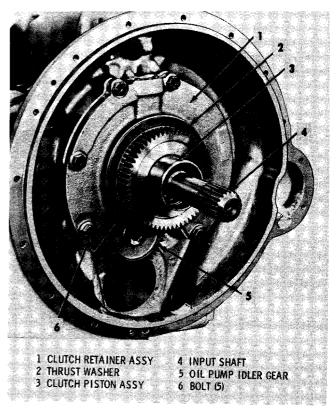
Clutch retainer and input shaft (VS2 series)
